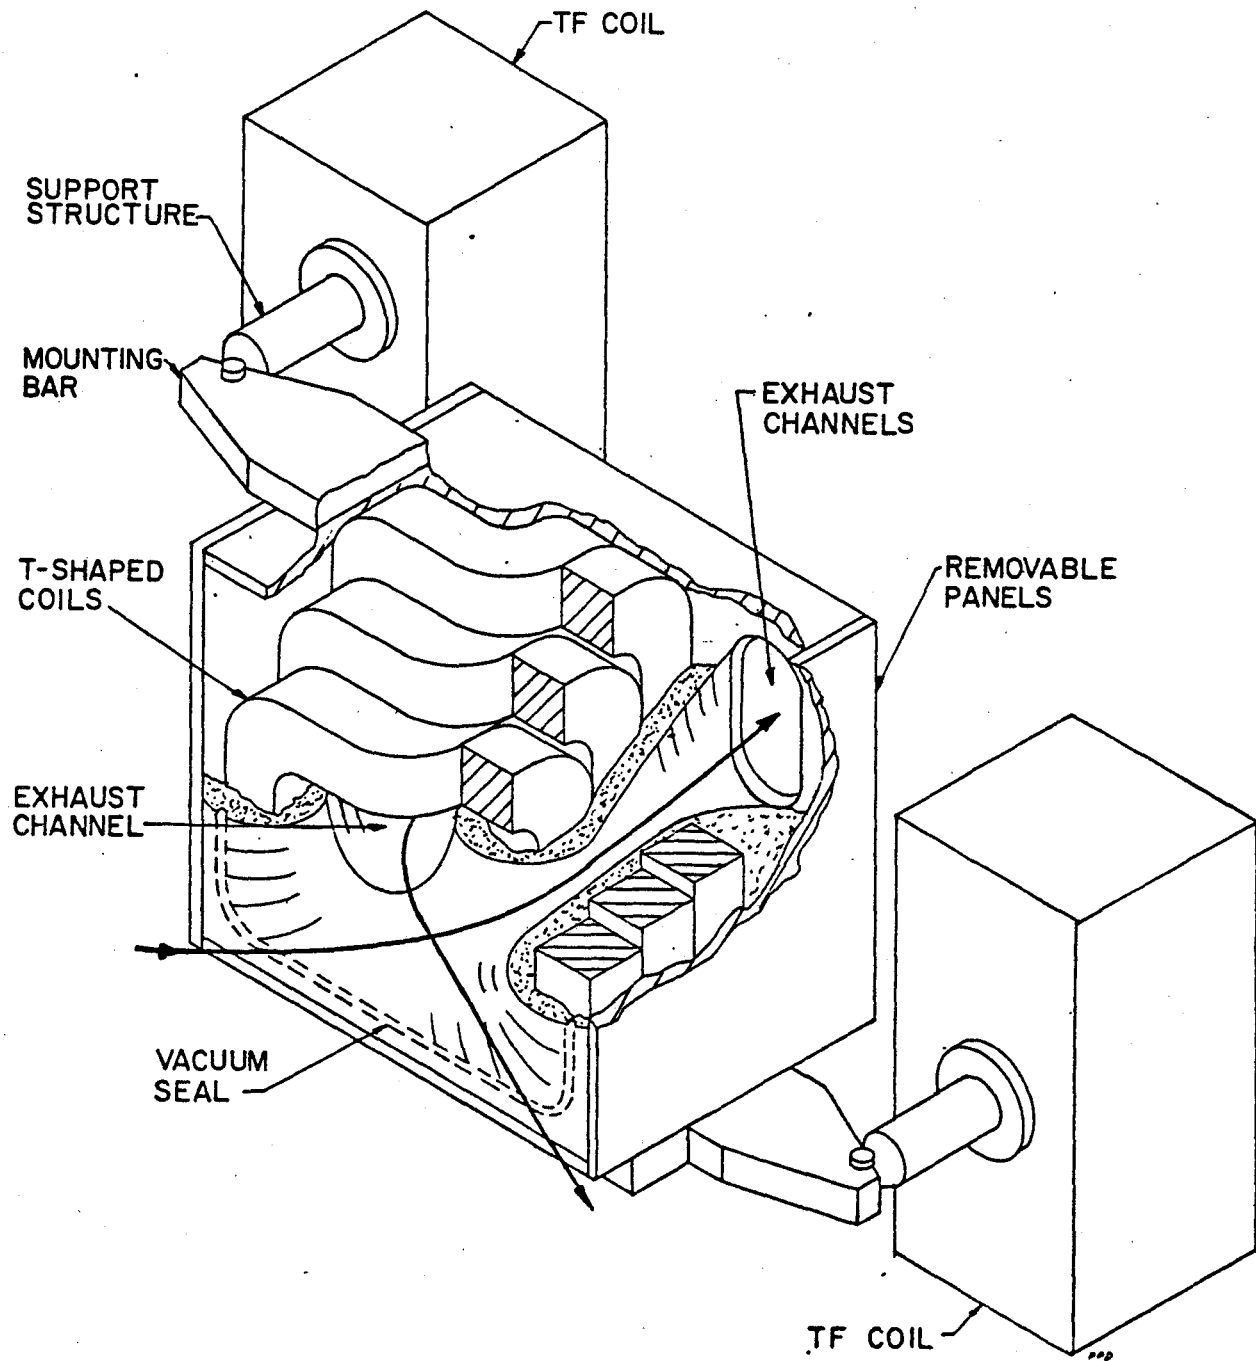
Illustration of engineering concepts of the TEXTOR bundle divertor assembly.
